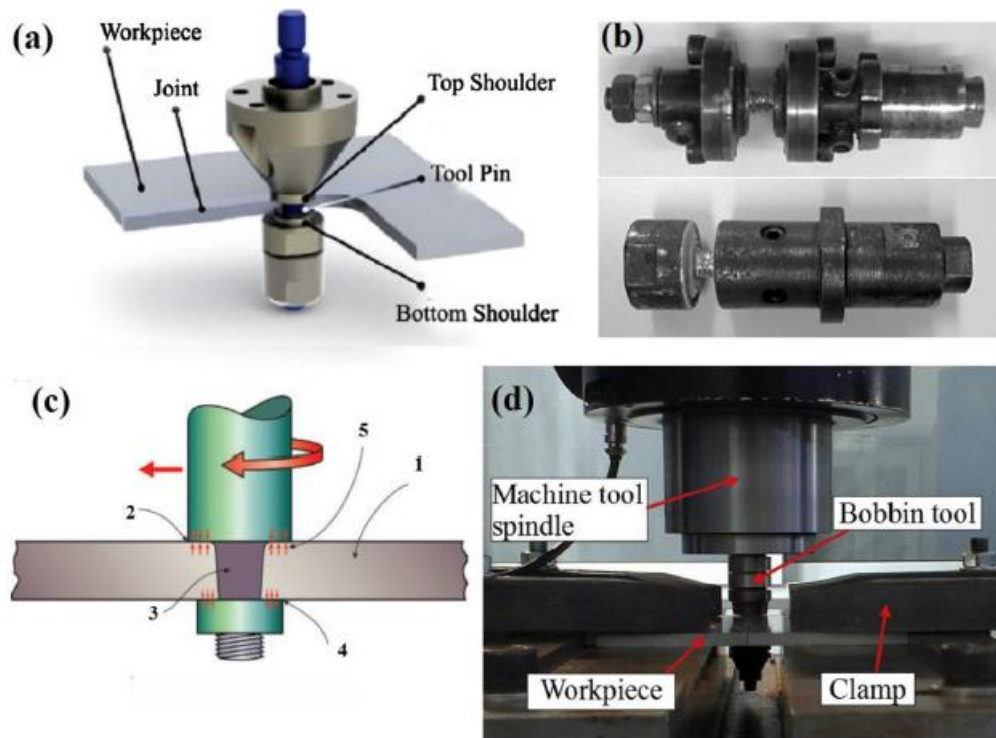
Bobbin-Tool process (a) “Schematic” [17], and (b) photo of tools [18]
